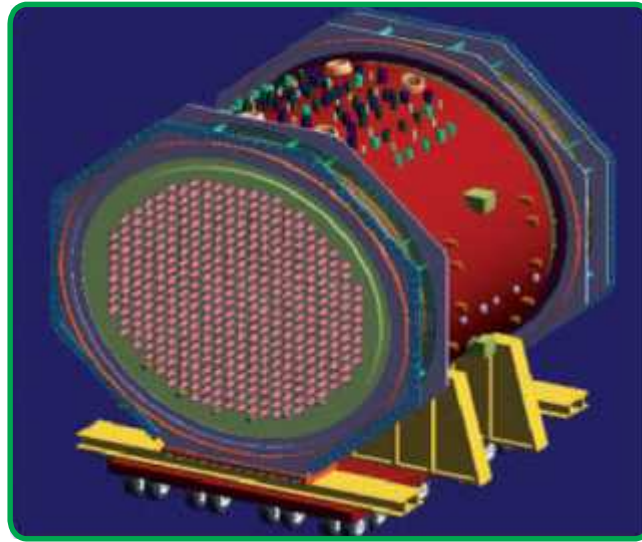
View of Calandria and Endshields showing coolant channels and penetrations
